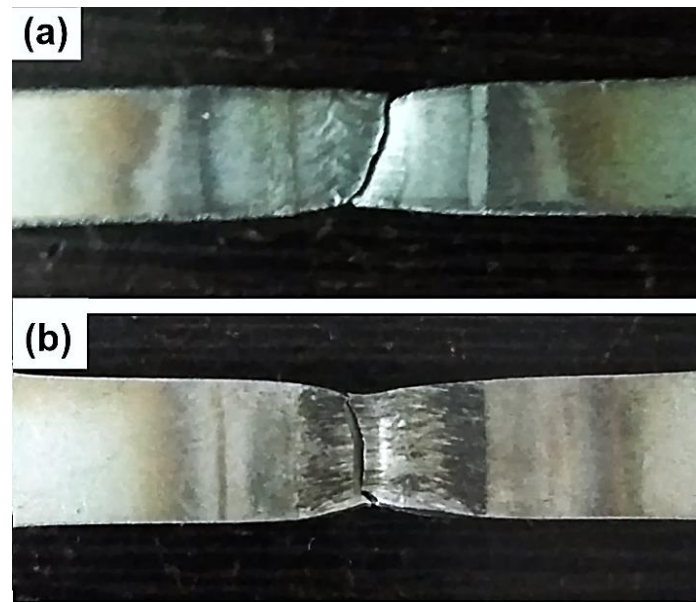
Tensile specimens after fracture for: (a) sample 2; (b) sample 3
